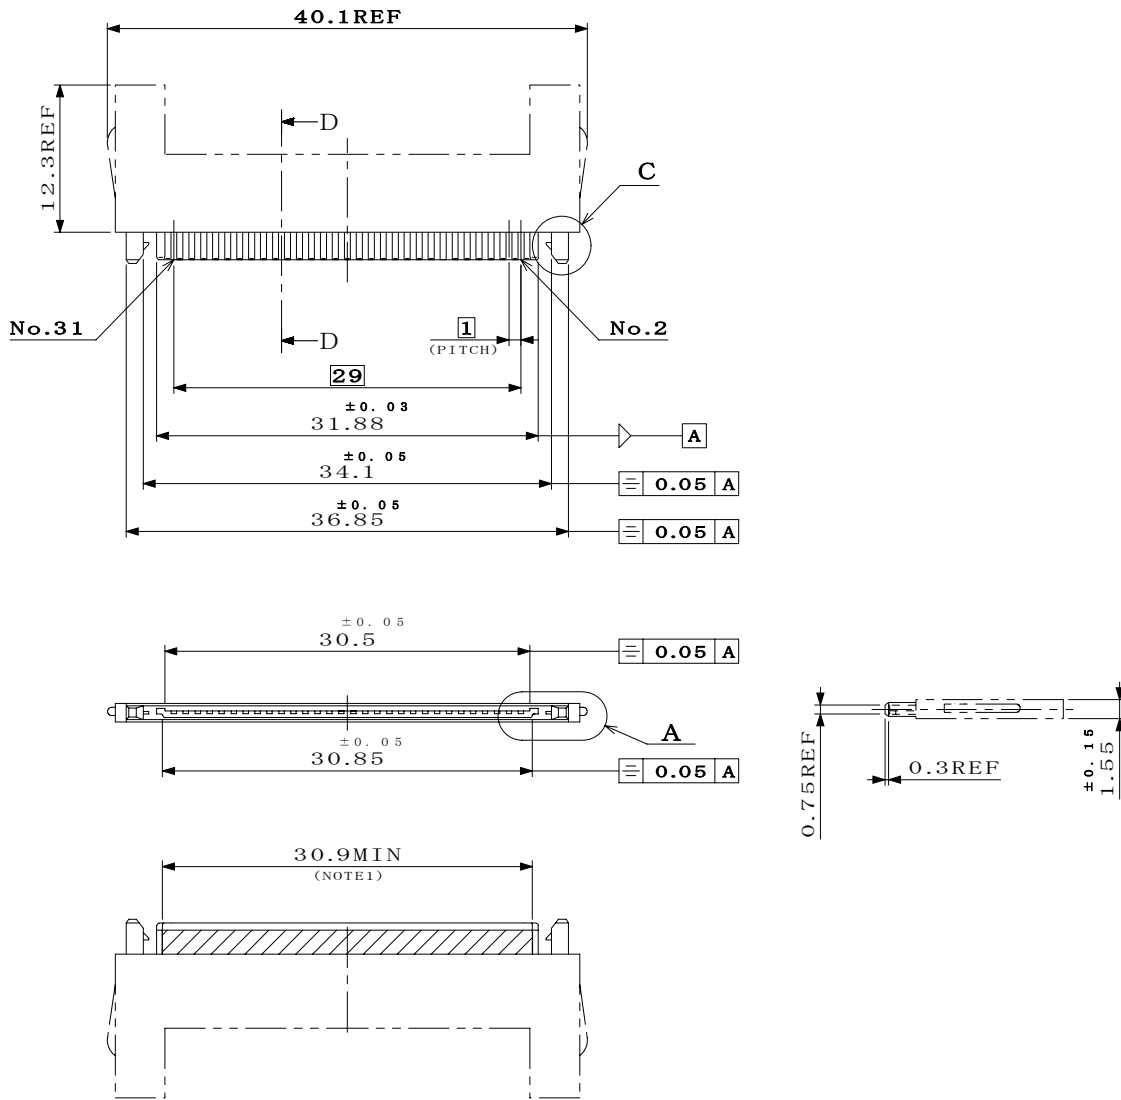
Panel-side Internal PCB mount Receptacle Connector (in unit of mm)
